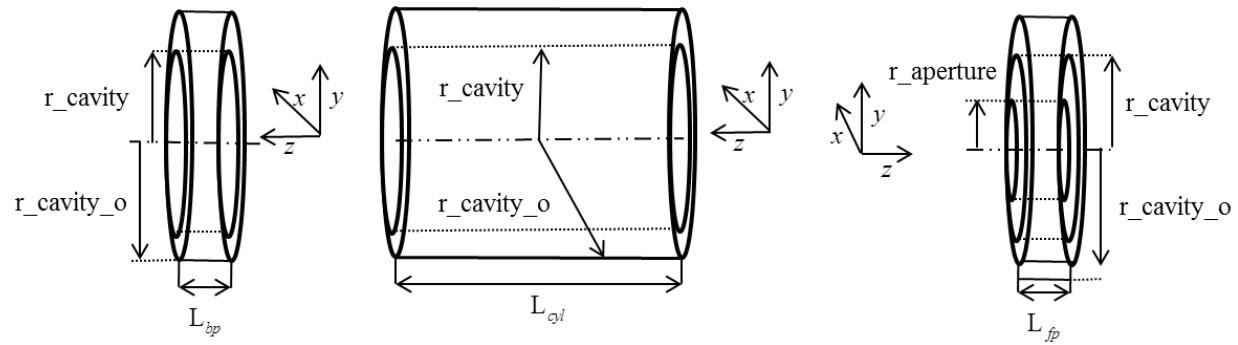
exploded view of the windowless horizontal cavity reactor
